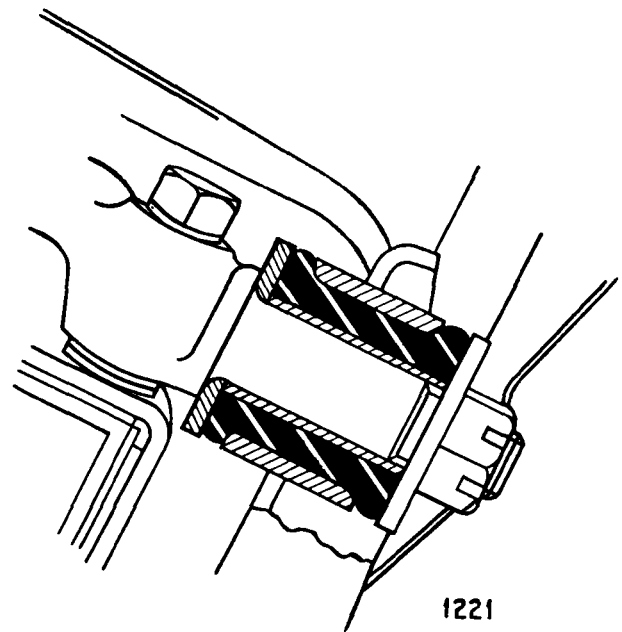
Section through one of the upper wishbone rubber/steel mounting bushes.
